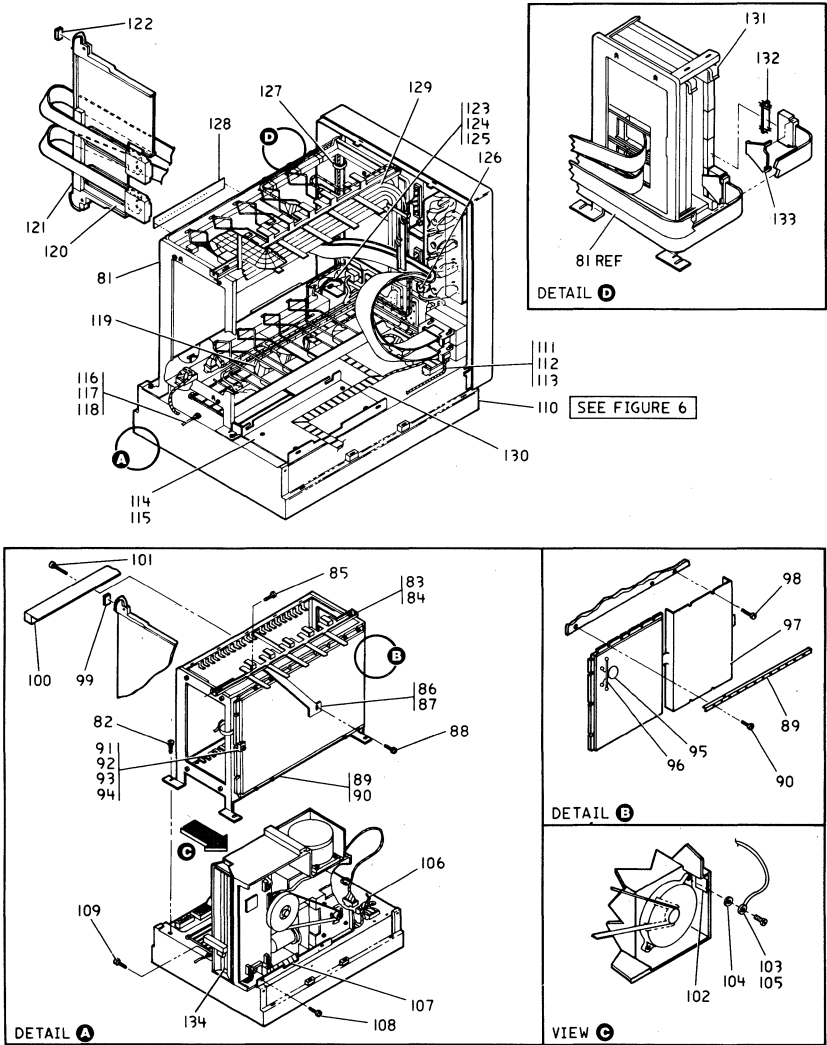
4701 CONTROLLER ASSEMBLY (5 of 5)
